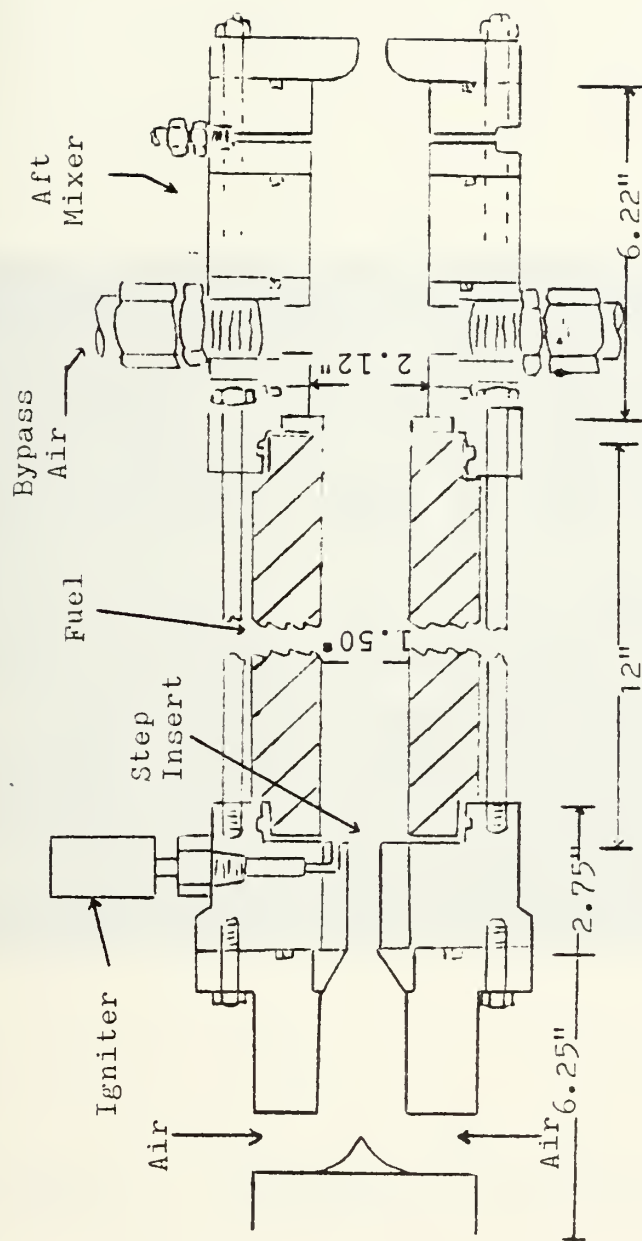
Schematic of Solid Fuel Ramjet Assembly
